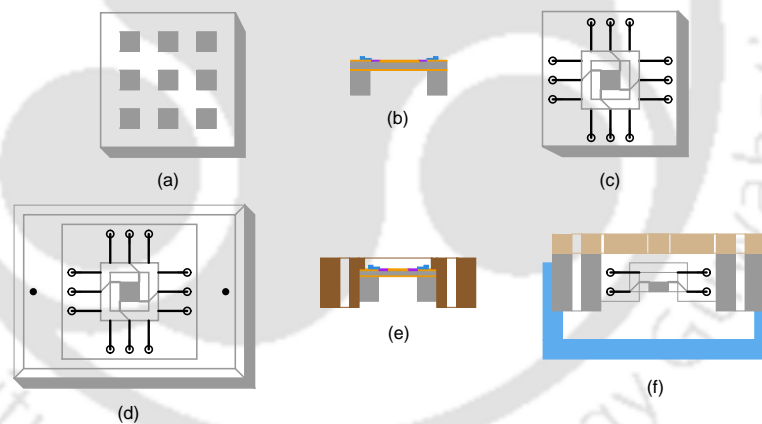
Process flow for the packaging of piezoresistive pressure sensor (a) Device fabrication, (b) Wafer diced using a diamond cutter, (c) Device embedded in a PCB, (d) PCB mounted on a PC flat sheet, (e) Cross sectional view, (f) Top side sealed with PC cavity cap.
